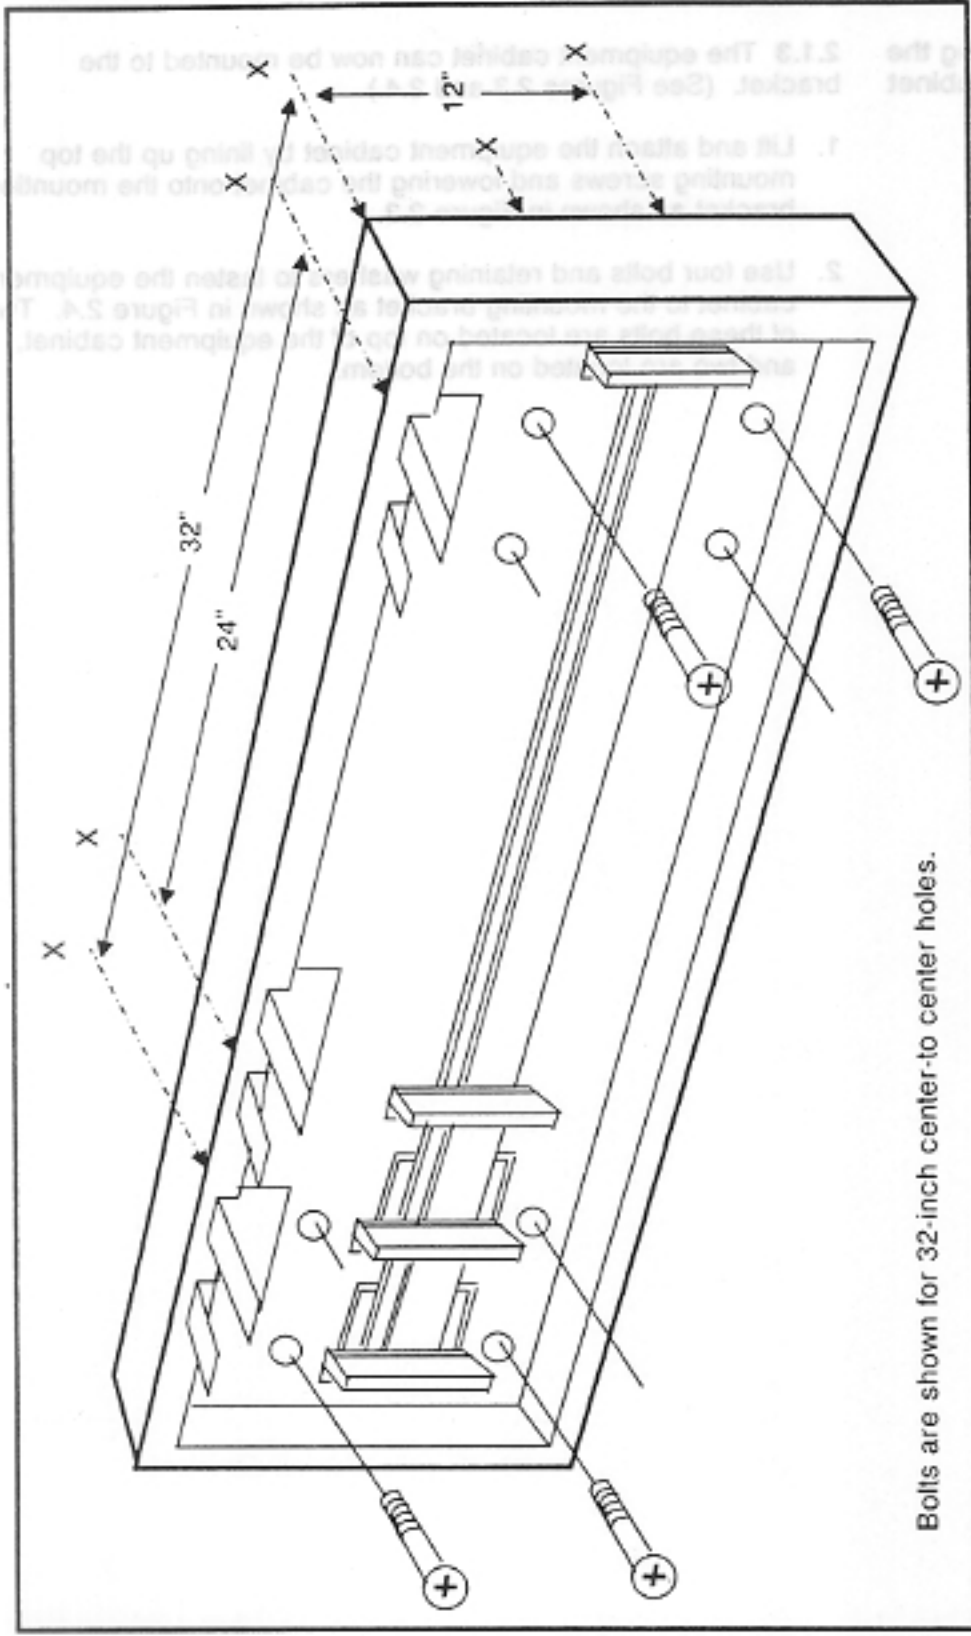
Preparation for Drilling Mounting Bolt Holes
